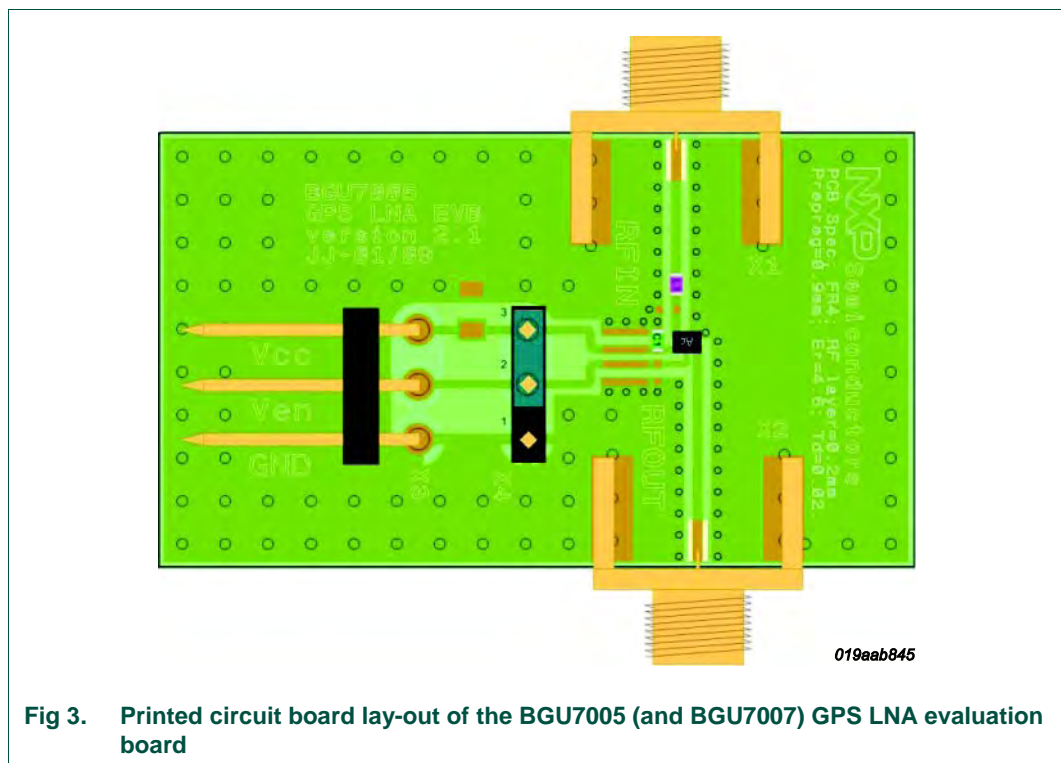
Printed circuit board lay-out of the BGU7005 (and BGU7007) GPS LNA evaluation board
